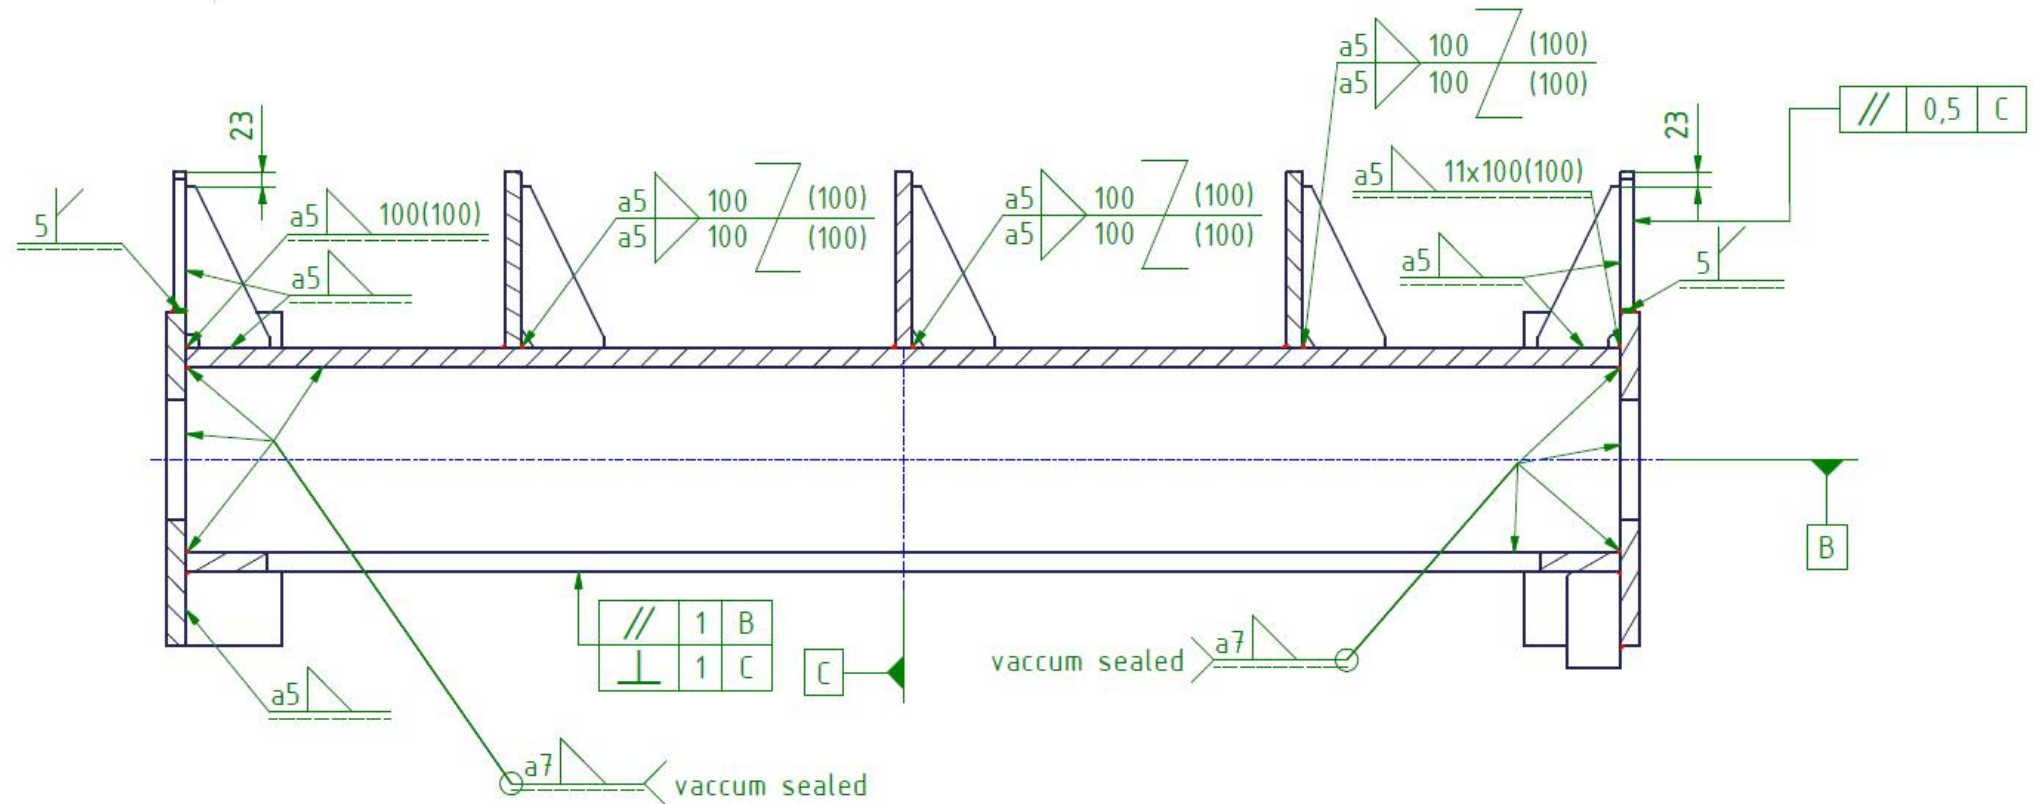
Drawing of vacuum chamber made of stainless steel 0H18N9
